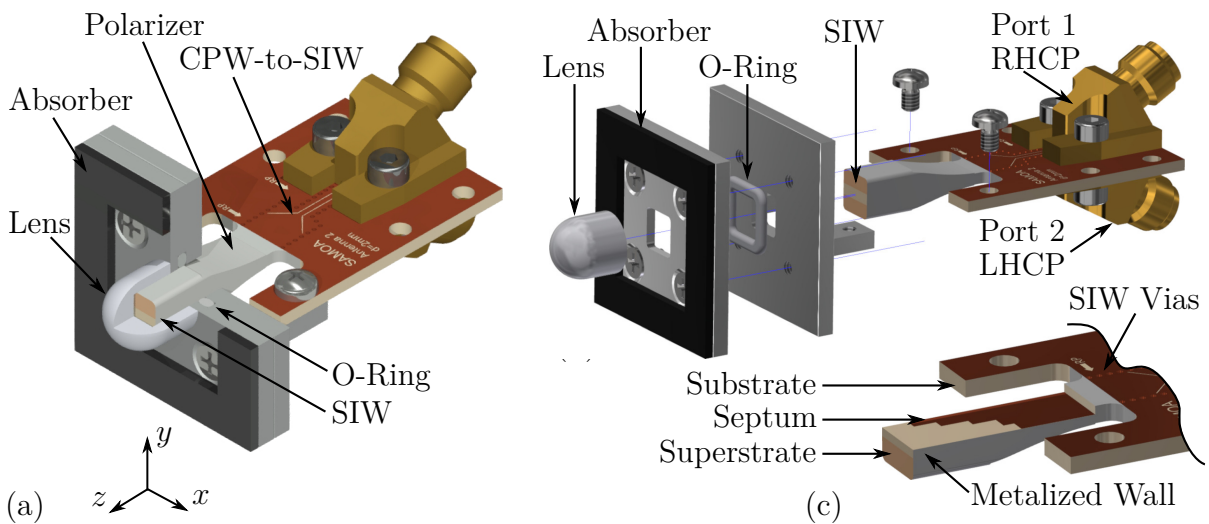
(a) Assembled and (b) exploded view of SIW lens antenna as well as (c) cut view of PCB.
